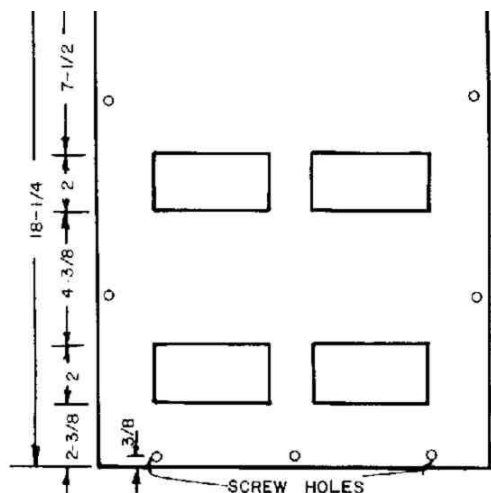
Front End (Operator's End) of Plywood Double-Action Piston Pump. The two 4 x 12-in. valve frames are shown by dashed lines, as is the 12 x 26-in. PARTITION. (tioned the same as the four valve holes in the front end.
